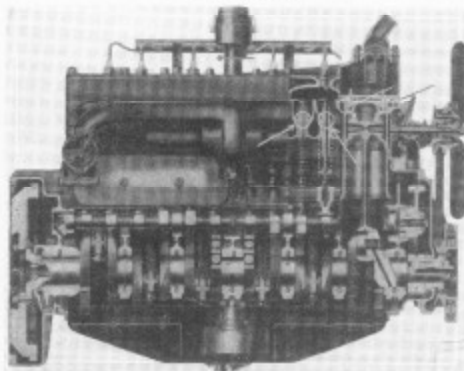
Wire the ignition system of motor from a chart and run the motor. Price: 2 Blue Prints, 2 Job Sheets, 50c.
